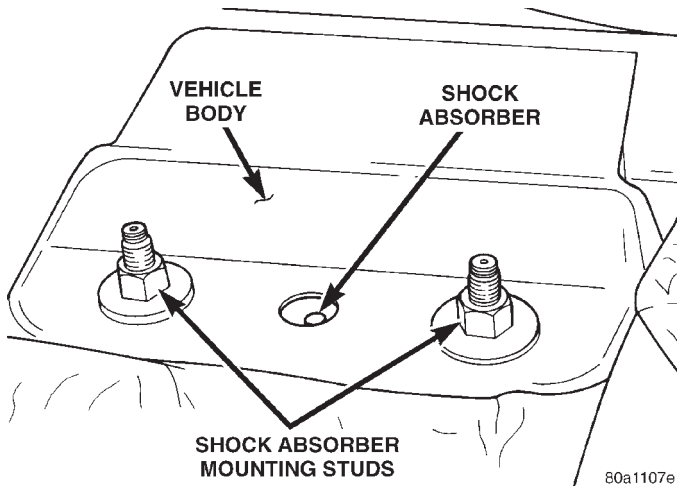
Shock Absorber Upper Mount Attaching Nuts
